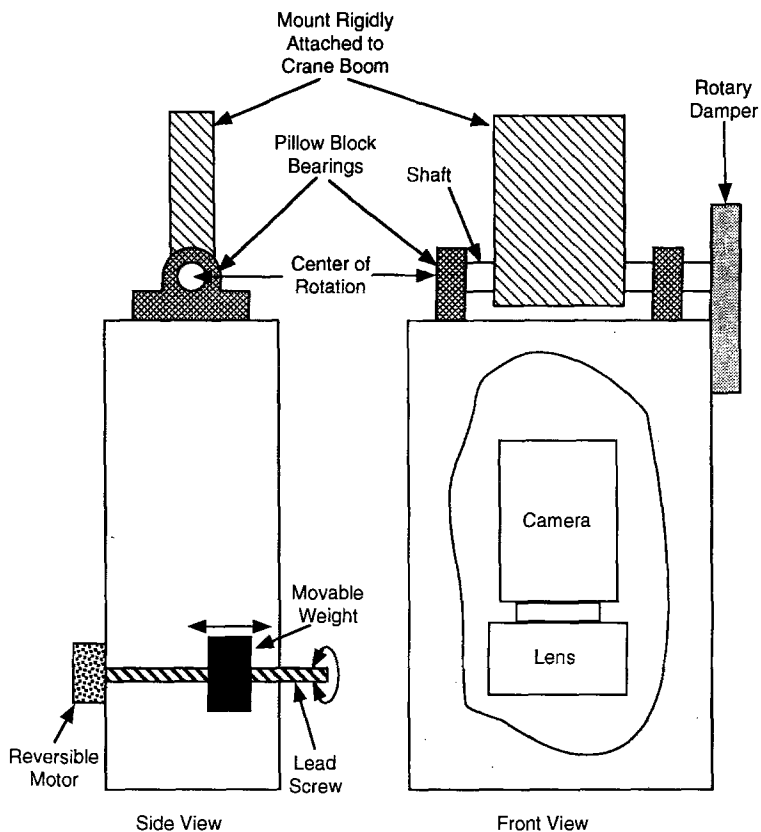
CRANIUM Camera Housing with Damped Gimbaled Mount and Angle Adjustment Mechanism
